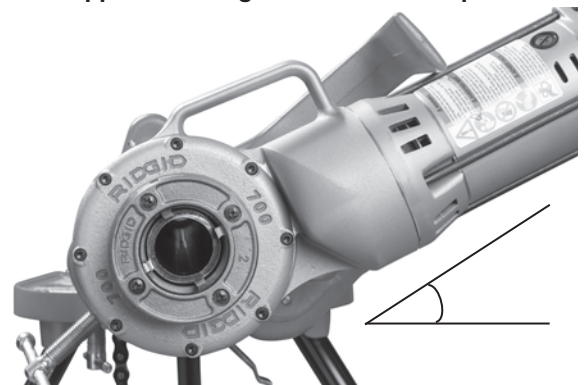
Support Arm Positioned With 700 Power Drive Slightly Above Horizontal
